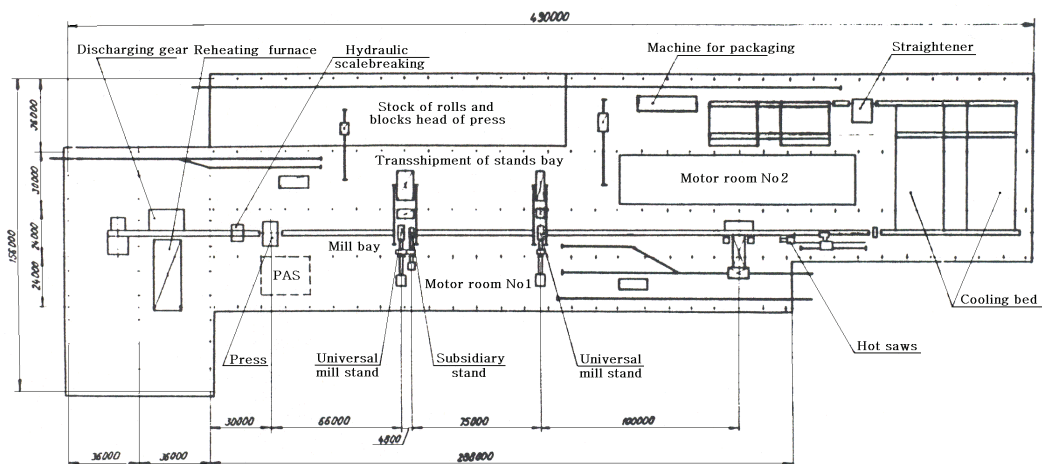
The layout of the equipment minicomplex “Press-Universal beam mill” (PAS – pump – accumulation station)
